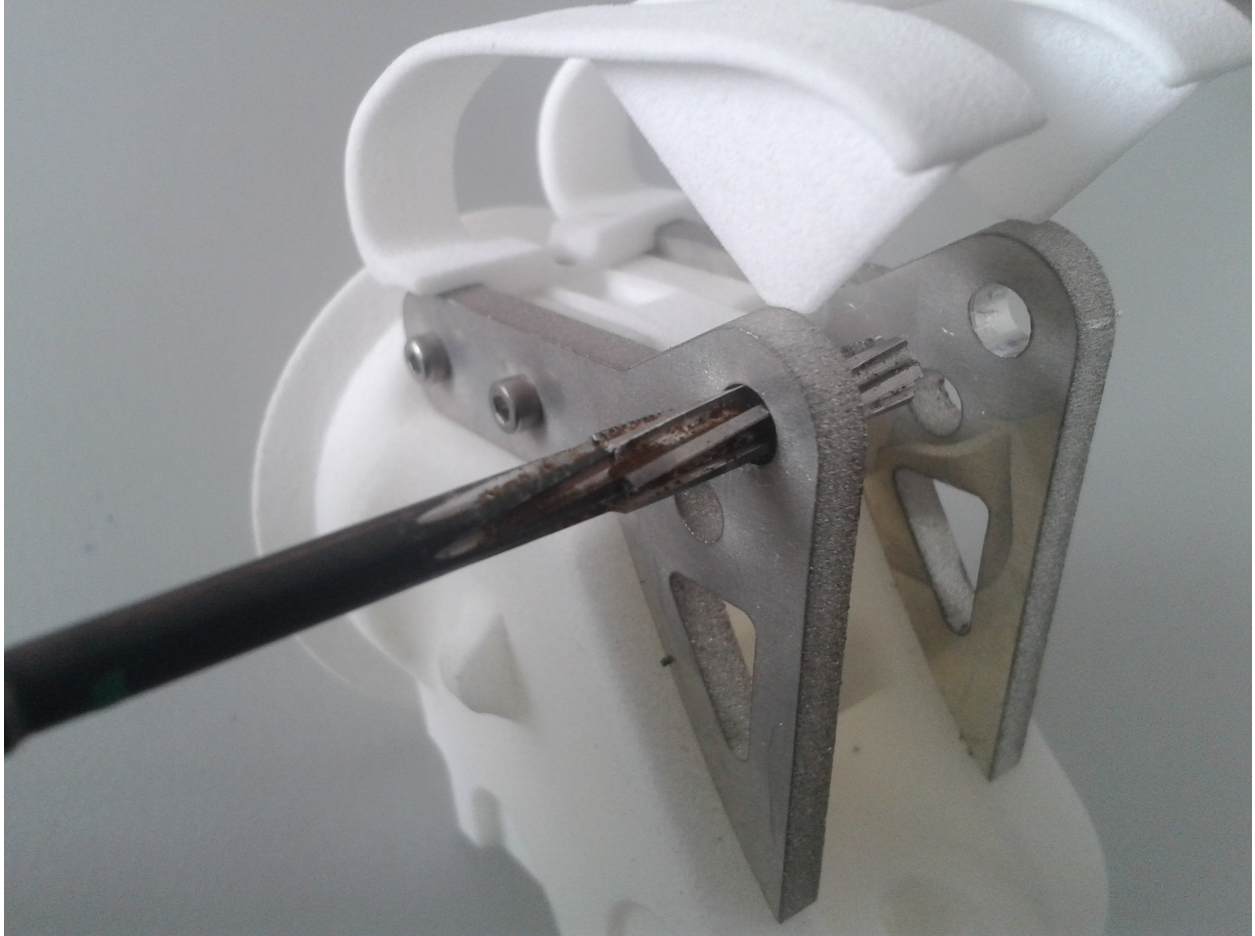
If needed adjust the diameter of the holes of the metal sheets.
